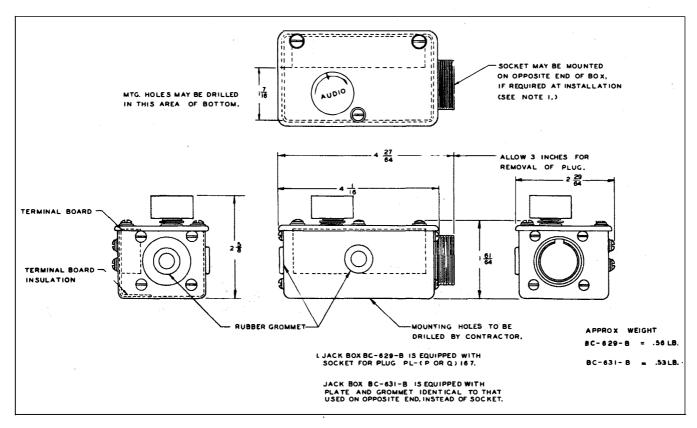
Jack Box BC-629-B or BC-631-B-Outline Dimensions
